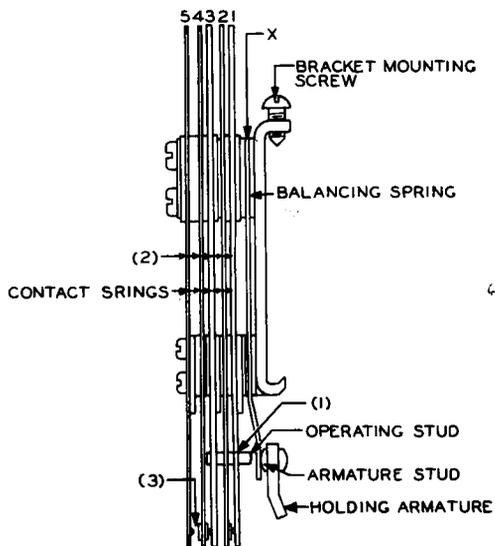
Fig. S — Clamp-Type Holding Off-Normal Spring Assembly
